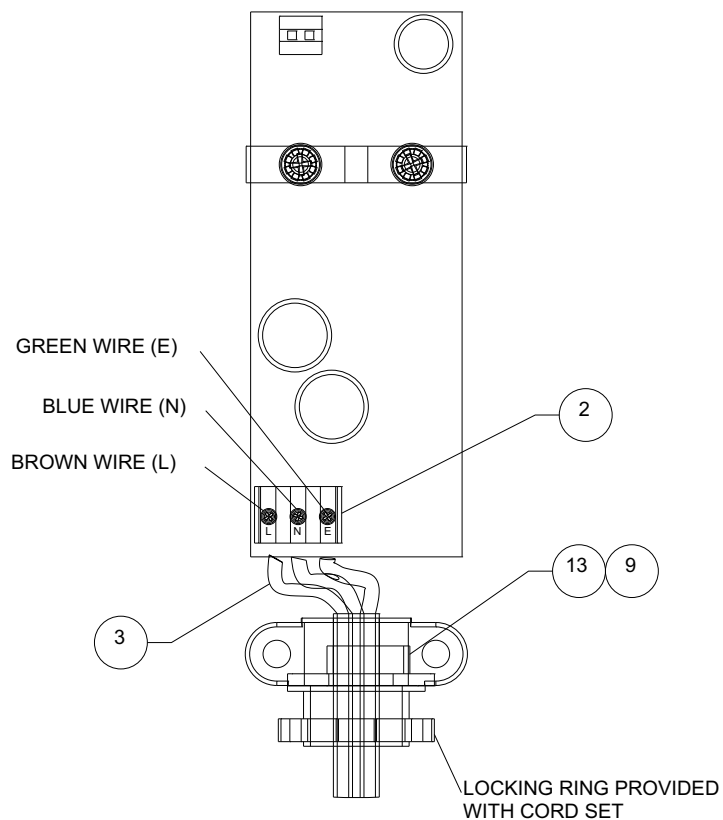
ELIL L860 Elevated LED Fixture PCB Wiring
